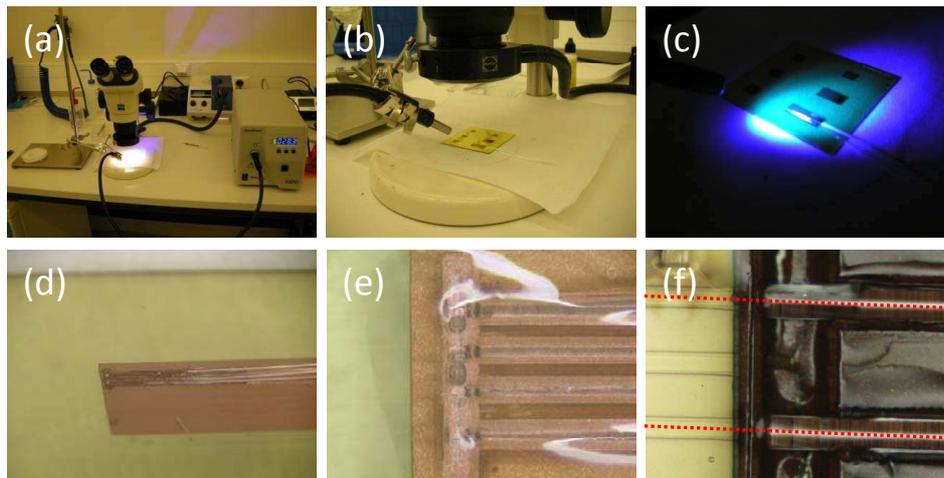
Mounting of the optical fibers inside the laser ablated U-grooves (a, b & c), side view of the mounted fibers (d) and top view (e & f).
